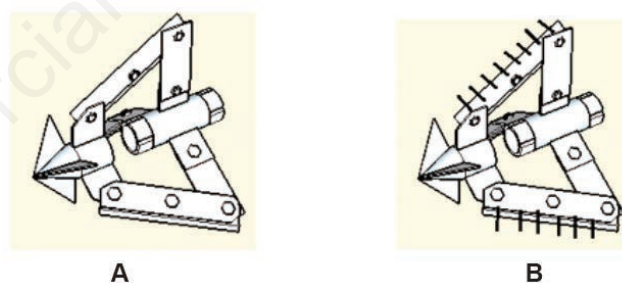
The blade assembly of mechanical sago pith extractor, (A) without teeth, (B) with teeth at different spacing.
